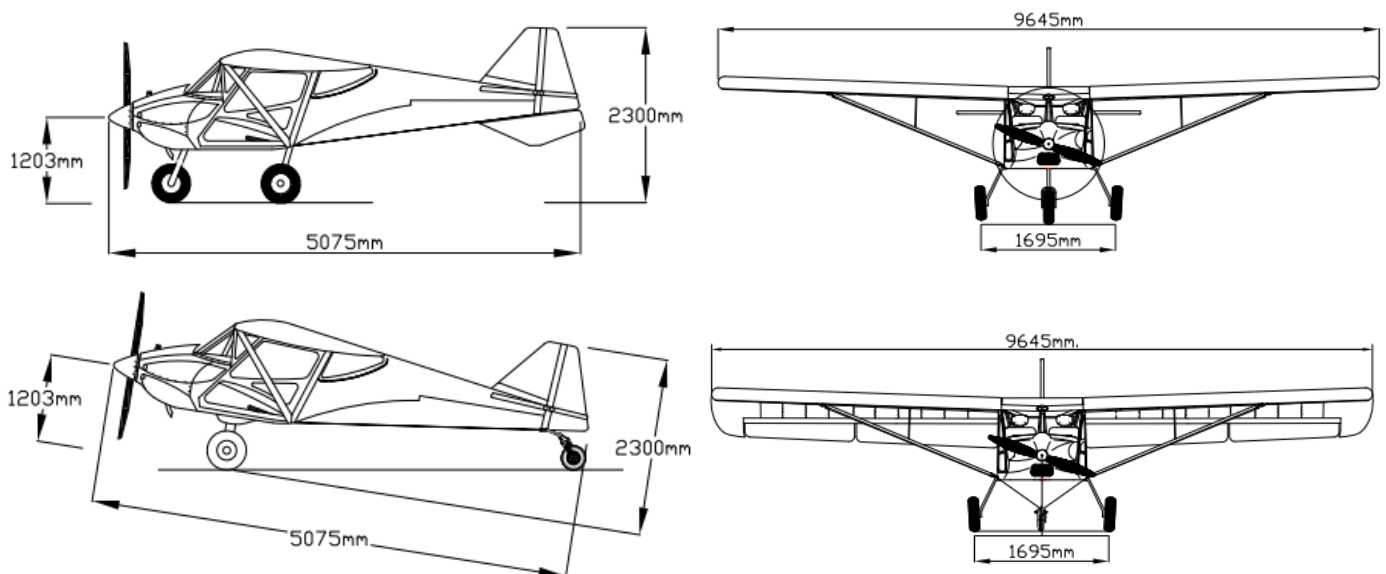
BushCat Aircraft Tricycle and Taildragger Landing Gear Configuration and Aircraft Dimensions [2]
